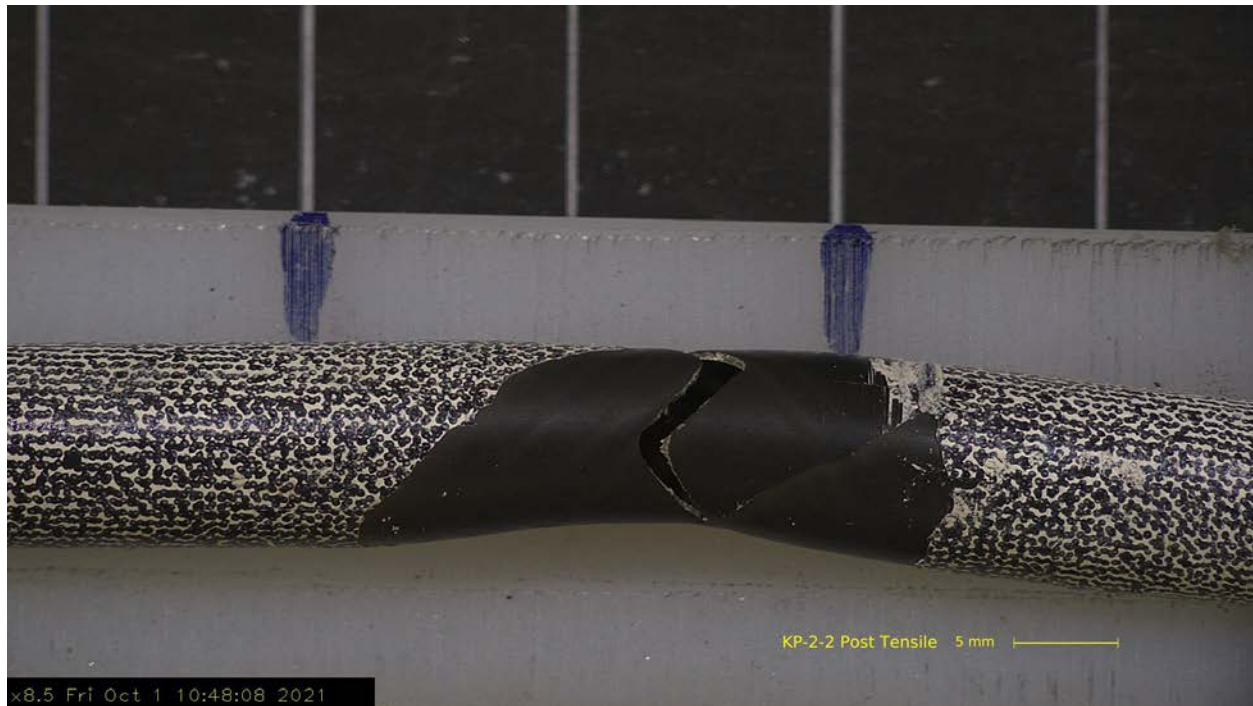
Post-Tensile Image Side 1 of Fracture for KP-2-2
